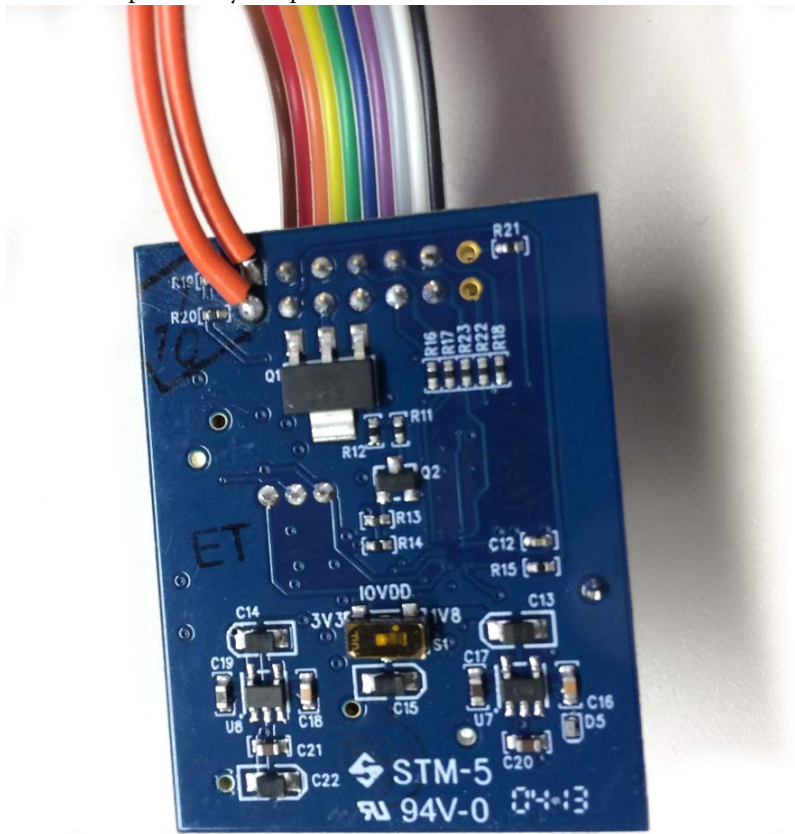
Jumper Wires Soldered to [EVAL-ADUSB2EBZ](#) J1 Pin 1 and Pin 2
